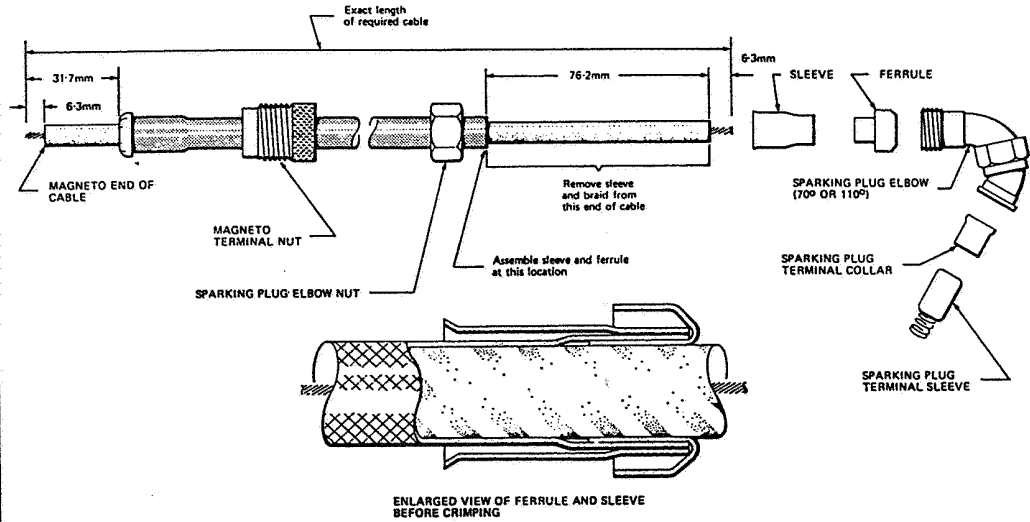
ASSEMBLY DETAILS OF IGNITION CABLES
